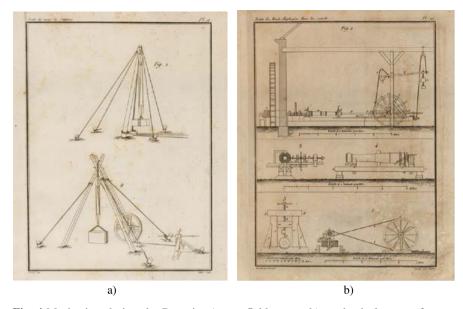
Mechanism designs by Borgnis: a) a on-field crane; b) mechanical system for gun production
